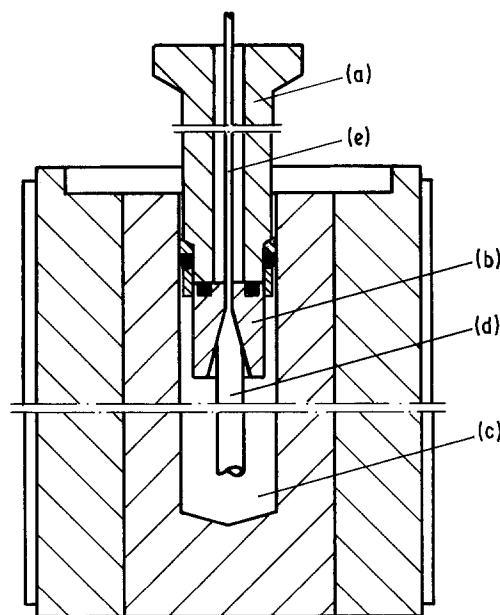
Schematic drawing of the device for hydrostatic extrusion showing (a) Piston, (b) Die, (c) Pressure medium (castor oil), (d) Billet (pre-extrudate), (e) Extrudate.
